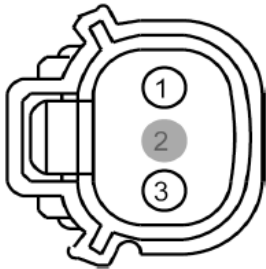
Coil On Plug 5 Connector End View (C1615)
